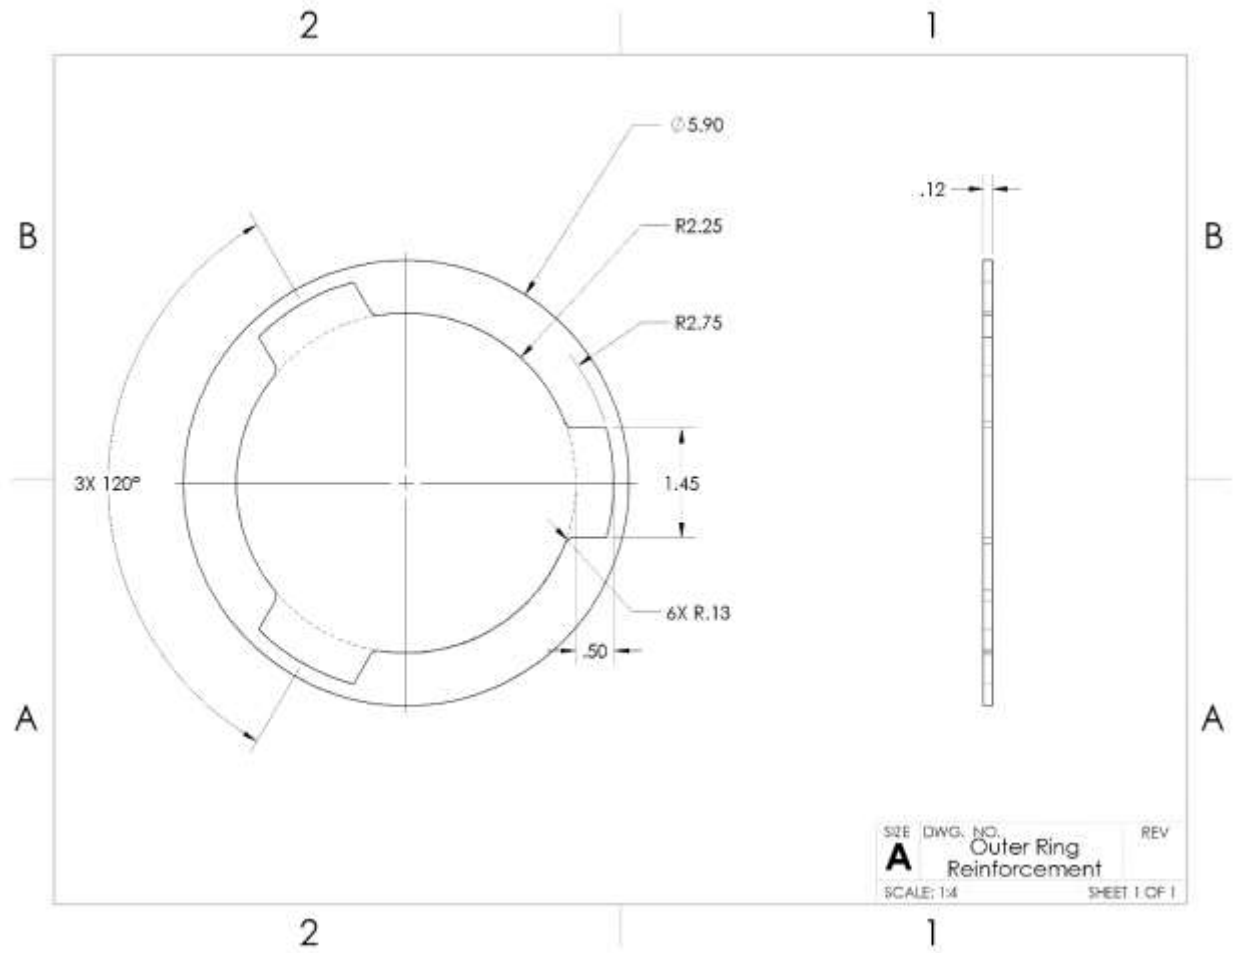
Locking Mechanism Outer Ring Reinforcement Drawing
